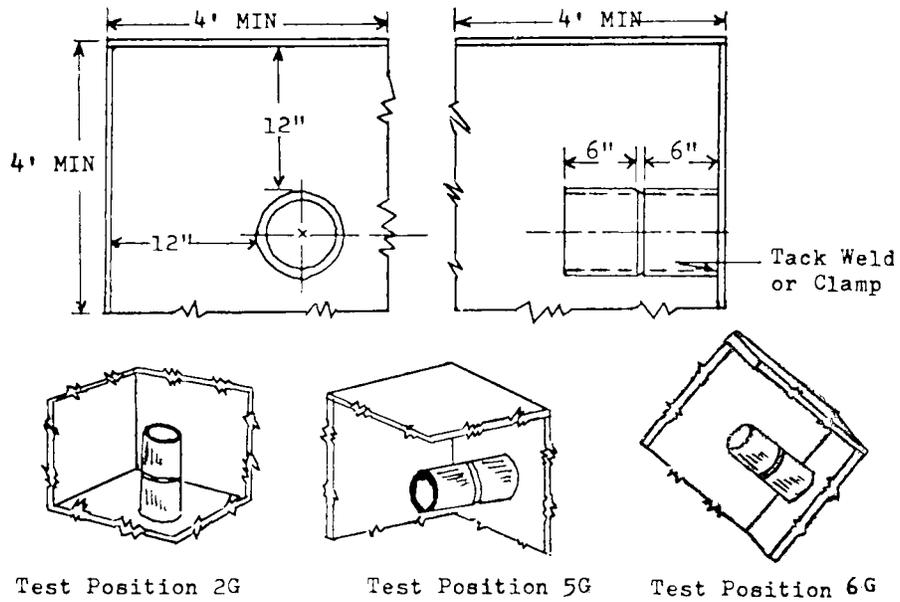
(A)—LIMITED SPACE RESTRICTION FOR PIPE WELDING PERFORMANCE QUALIFICATION
